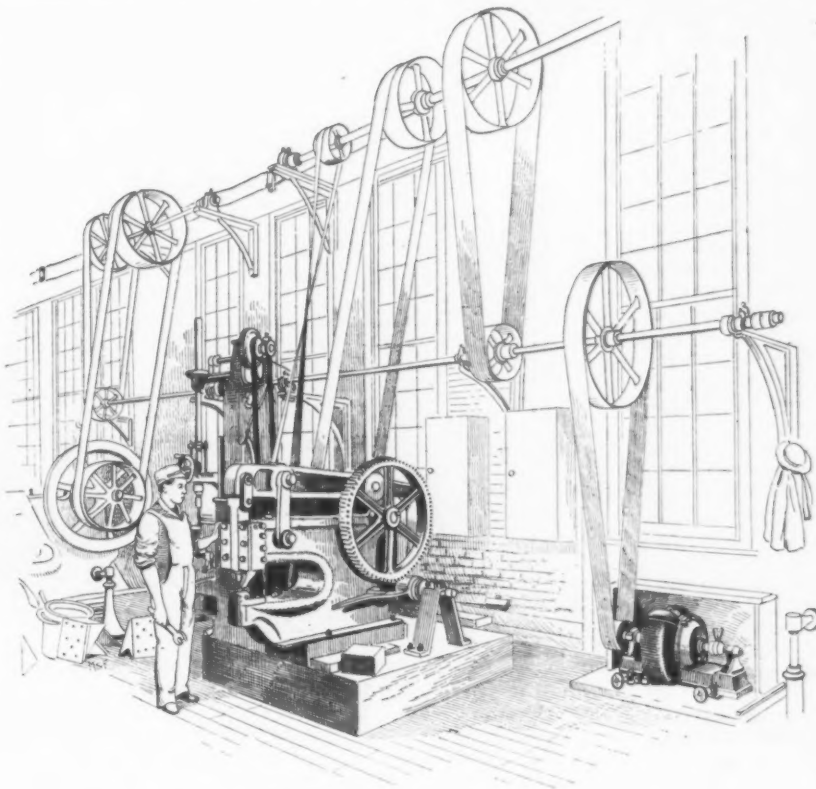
Electric Motor Driving Shear, Upright Drill and Punch.
